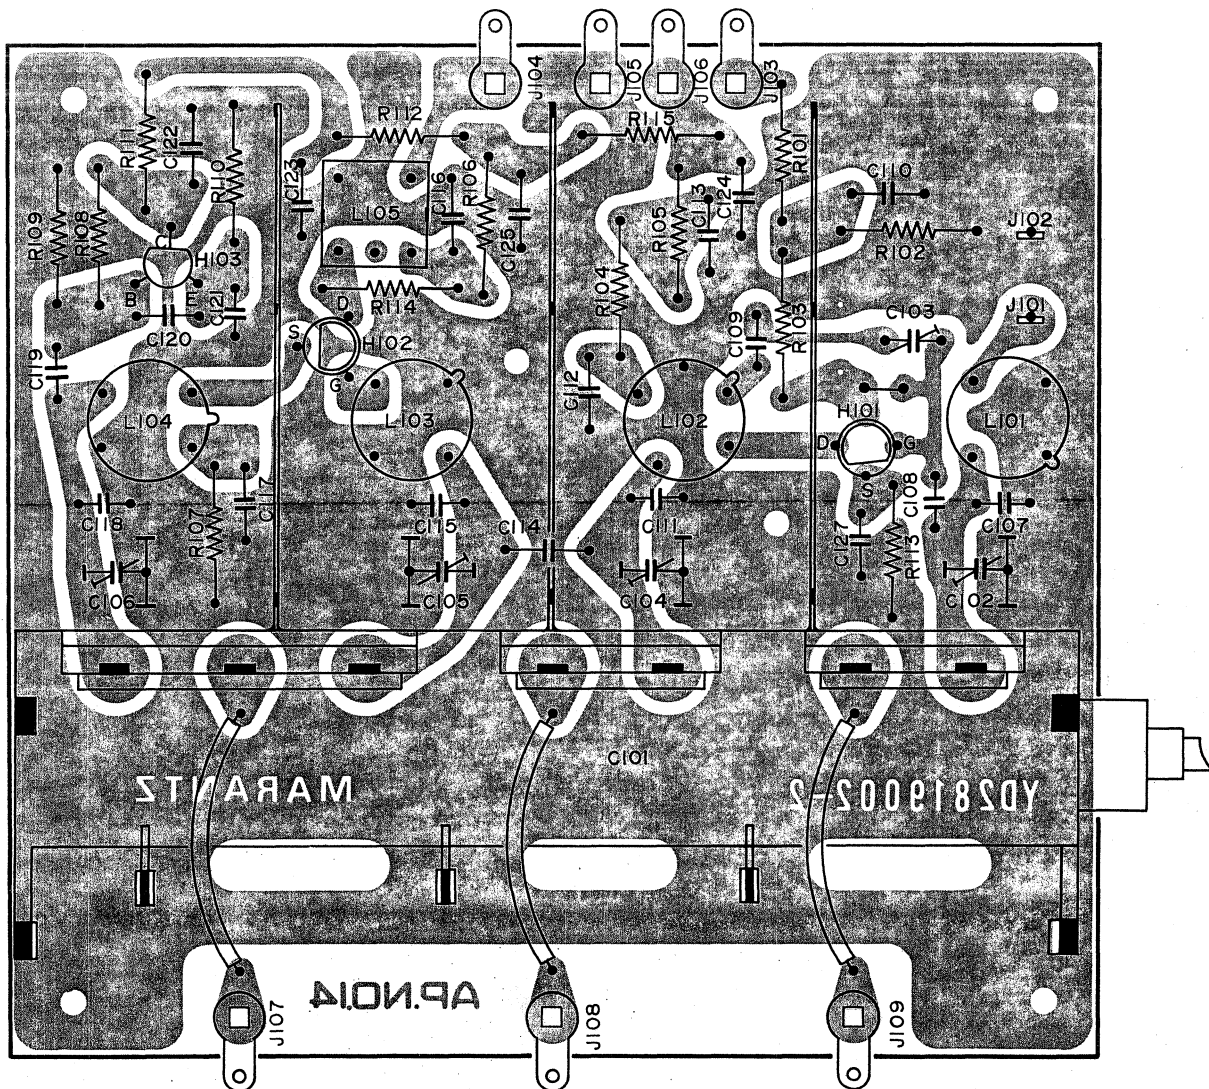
FM Front End Board – P100 Component Assembly Diagram
